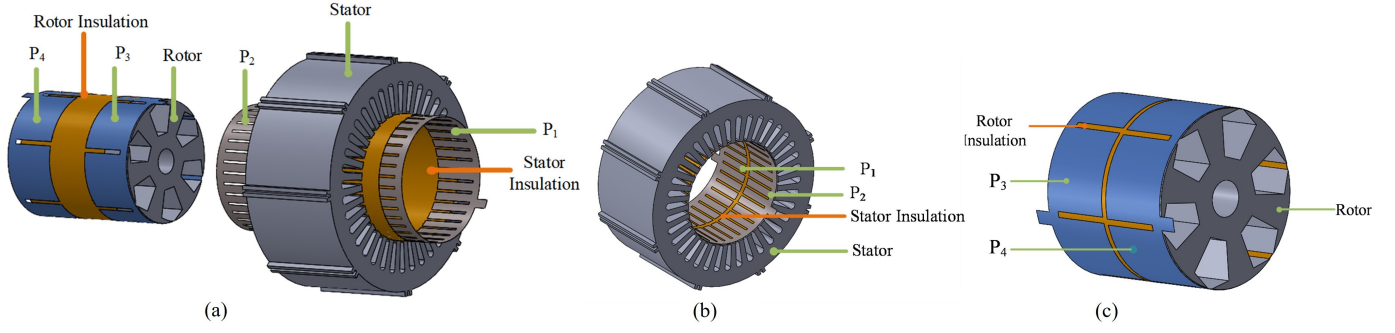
3D model of the proposed design. (a) Exploded view of the proposed design. (b) Stator plates on the rotor core. (c) Rotor plates on the rotor core.
